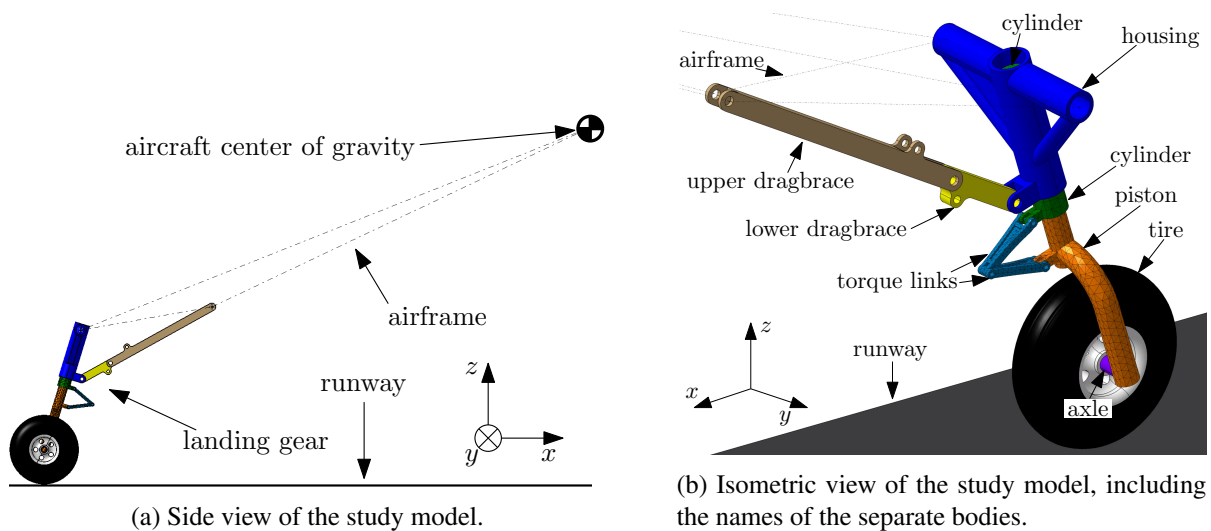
Side and isometric views of the landing gear model that is investigated in this study.
